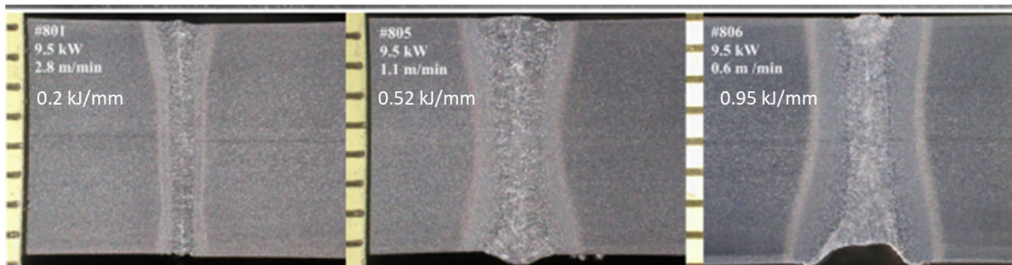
Cross-sections of laser welded S960 steel ( $t=8$  mm).
